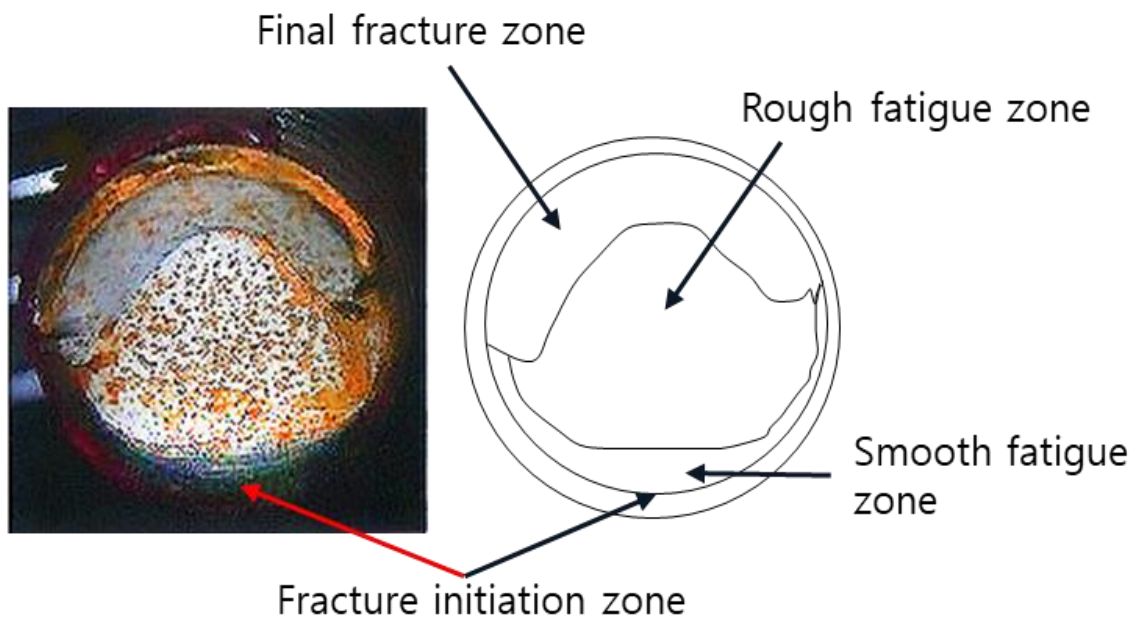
Macrograph and schematic of fracture surface of one of the fixing bolts (R10)
